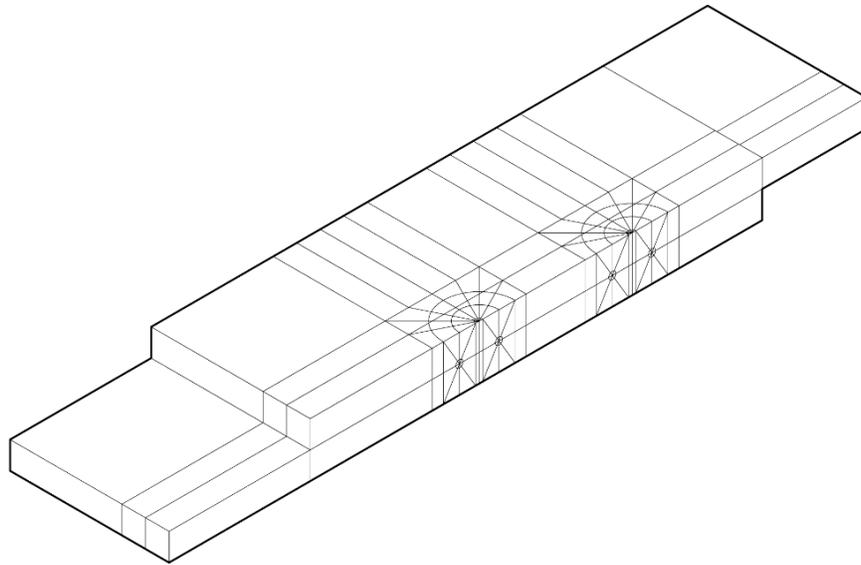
StressCheck 3D model of two plates connected with two spot welds
